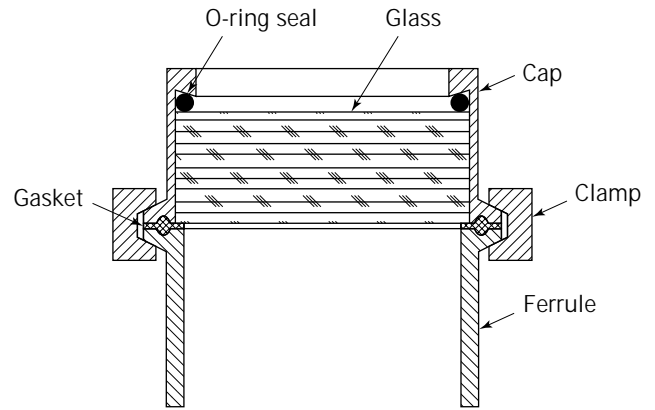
Side viewport with separate glass piece sealed by two gaskets.
